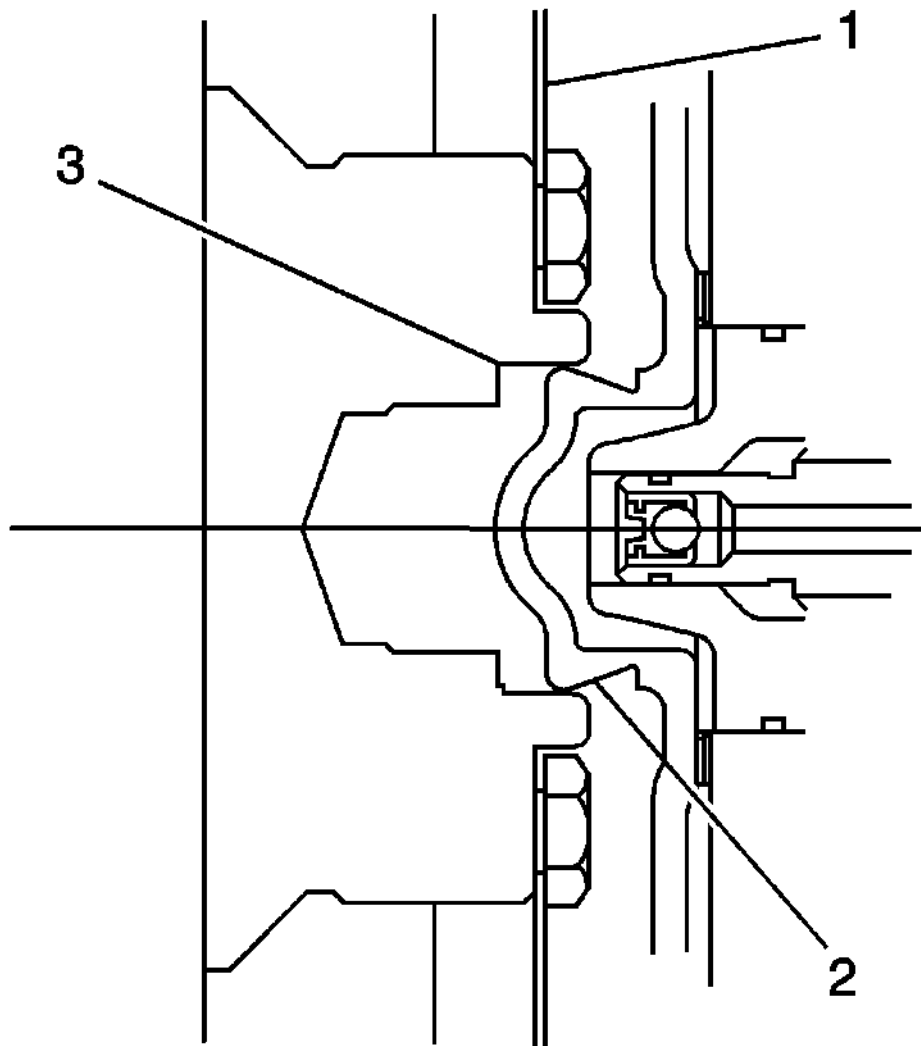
View Of Torque Converter Hub In Engine Crankshaft
